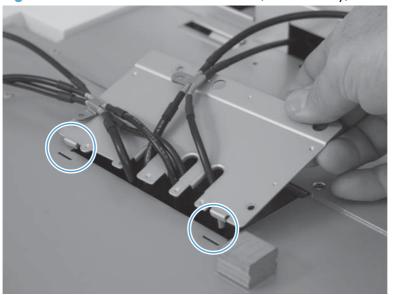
Remove the interconnect PCA, fan assembly, and DC connector PCA (1 of 6)
